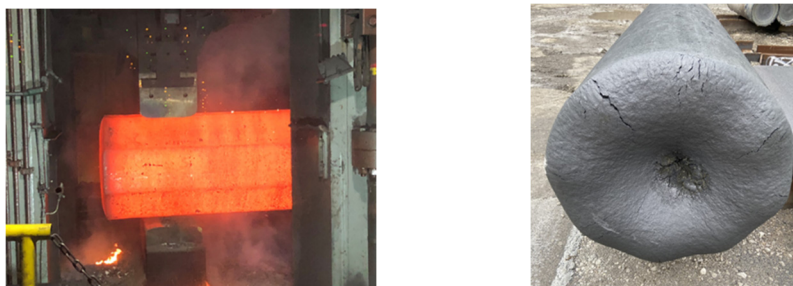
a) Forging 44-inch diameter ingot, b) Ingot after forging.
